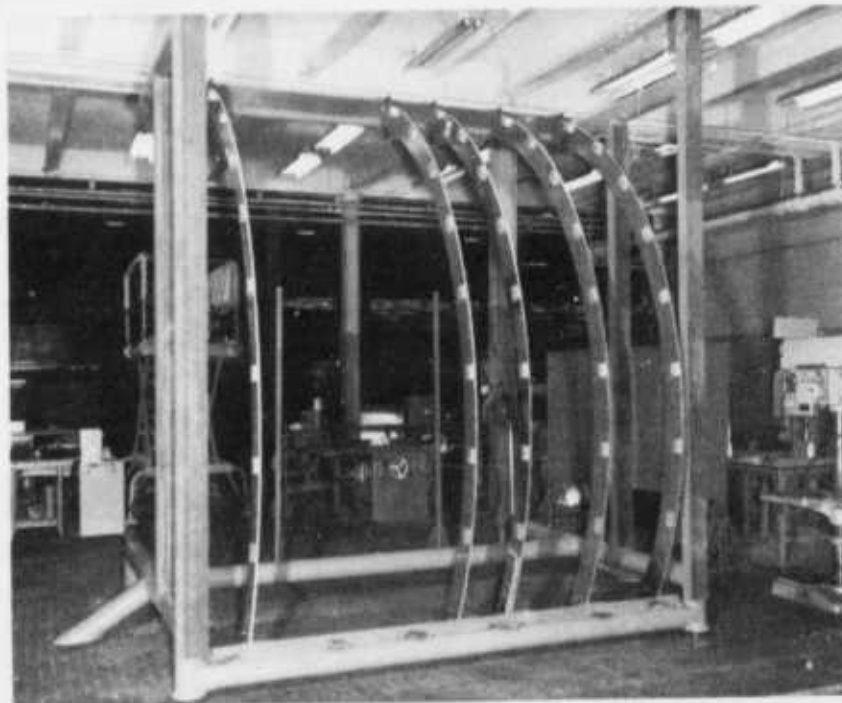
FINAL ASSEMBLY TOOL PARTIALLY FABRICATED
